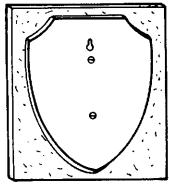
Use screws or nails to attach the item to be duplicated to the particleboard side of your fixture blank.
